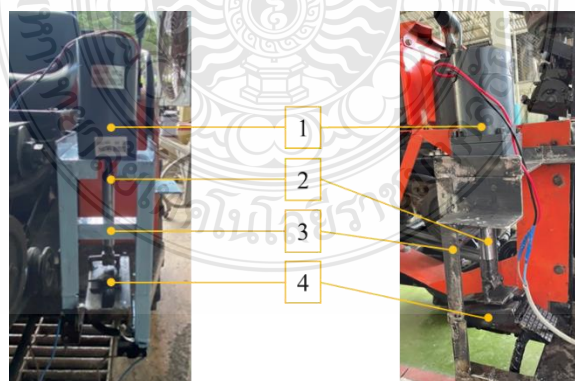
Brake System. (1) Actuator of the brake system; (2) Brake Shaft; (3) ActuatorHolder; (4) Brake Pedal Pad.
